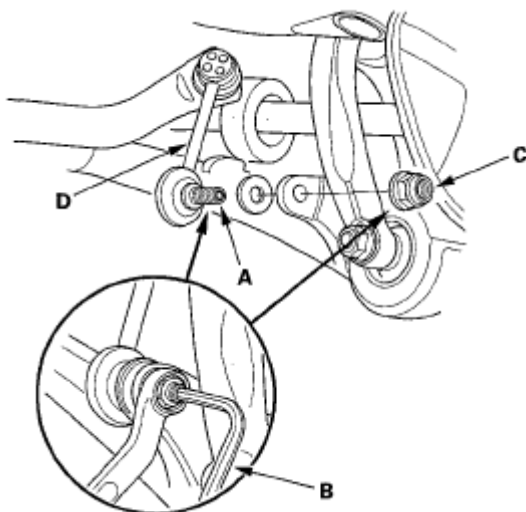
Identifying Stabilizer Ball Joint Pin, Hex Wrench, Flange Nut And Front Stabilizer Link
